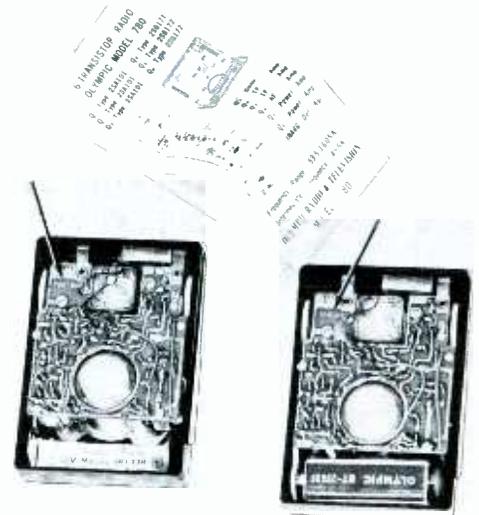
Printed boards often contain numbers that can be used to match sets.
